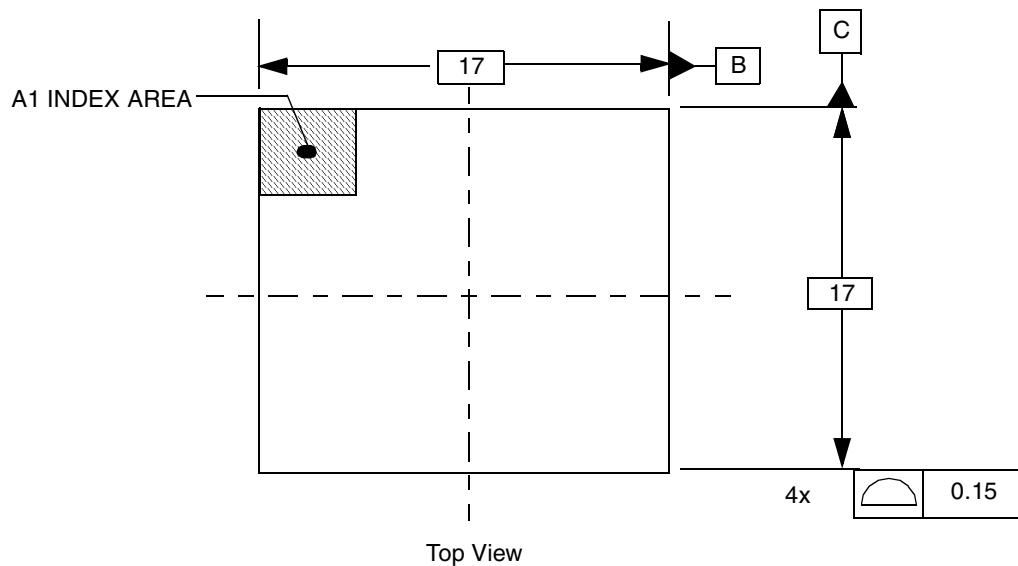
400 MAPBGA 17x17 mm Package Top view
